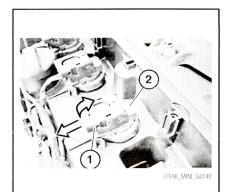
Unlock plug retainer (1) of ignition coil (2) and disconnect plug
